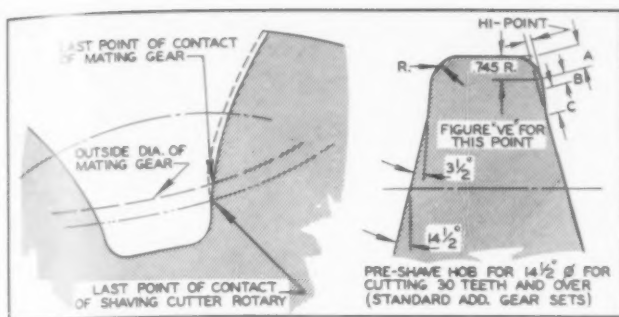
(left). The dotted line here paralleling the involute indicates the stock removed by shaving. Fig. 3 (right) illustrates a design for $14\frac{1}{2}$ deg P. A. pre-shave hobs, for cutting gears with 30 or more teeth.
